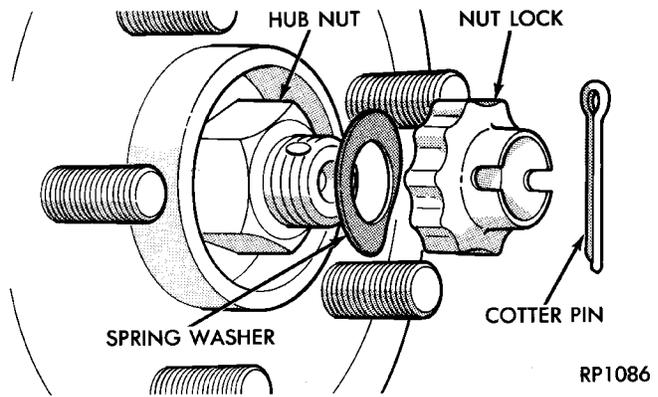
Cotter Pin, Nut Lock and Spring Washer
